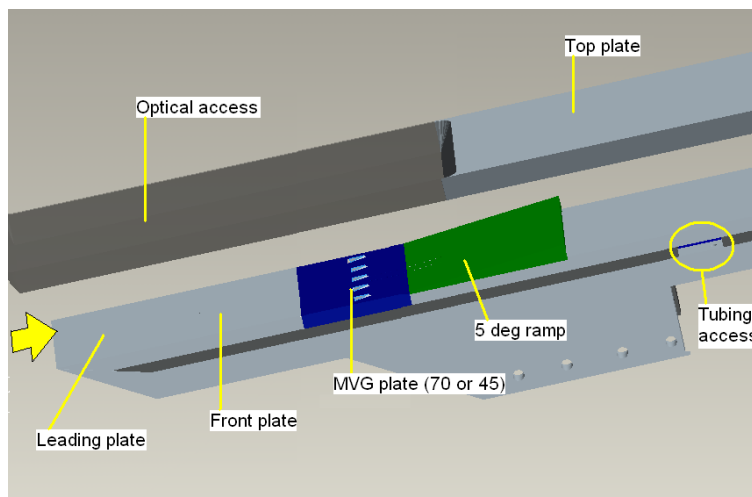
CAD rendition of "MVG+Ramp" assembly.
